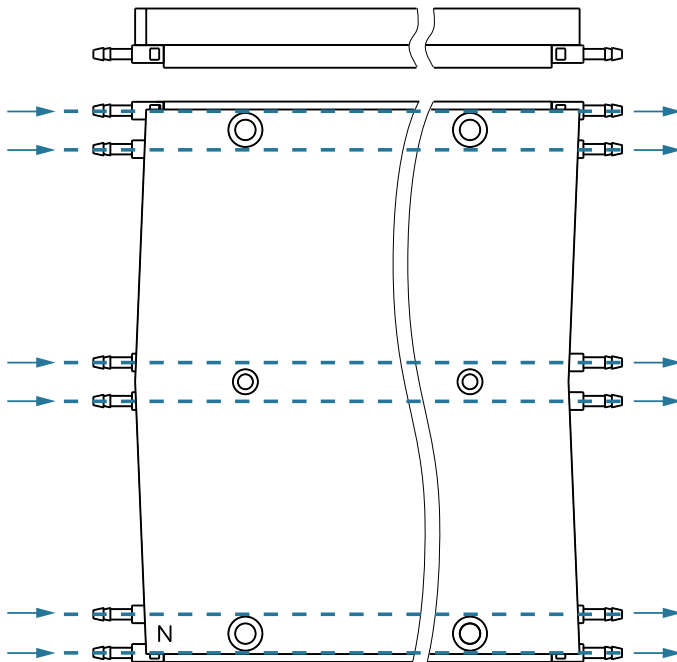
Secondary section cooling, comprising cooling sections with hose nipples for motors of sizes 1FN3600 ... 1FN3900 (side view and top view)
